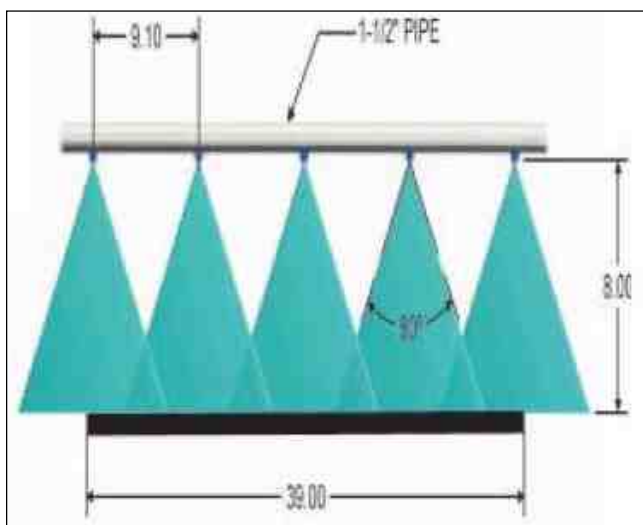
Flat spray nozzle manifold illustration using an 80° spray angle (Courtesy of Lechler, Inc., St. Charles, IL).
